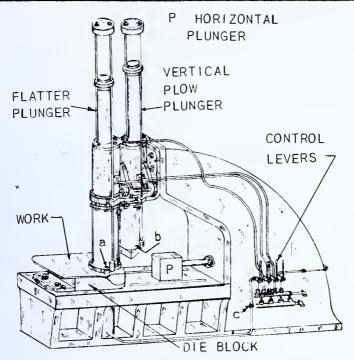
Hydraulic Sectional Flange Press Showing Controls
